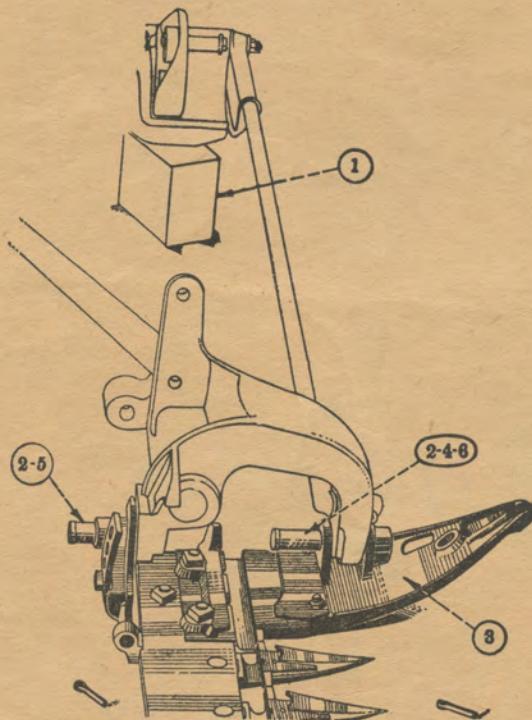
Illustration No. 2—Attaching cutter bar (inner shoe and hinge pins).
